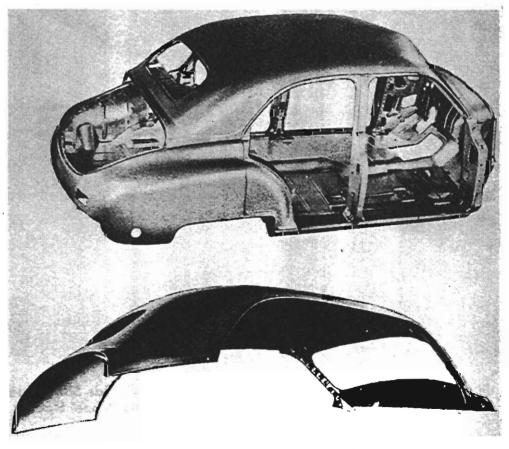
The Seamless Steel Top Has Slender Pillars and Reinforced Header and Cowl Construction.
